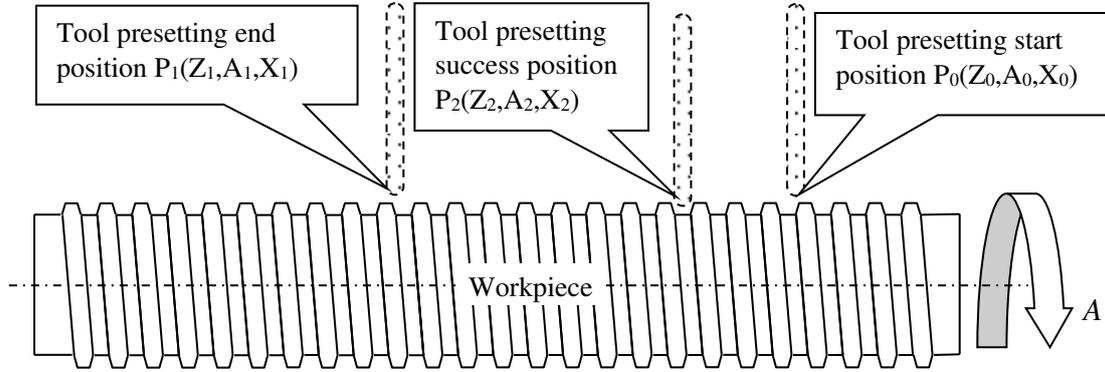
A schematic illustrating CNC lead screw tool presetting process.
